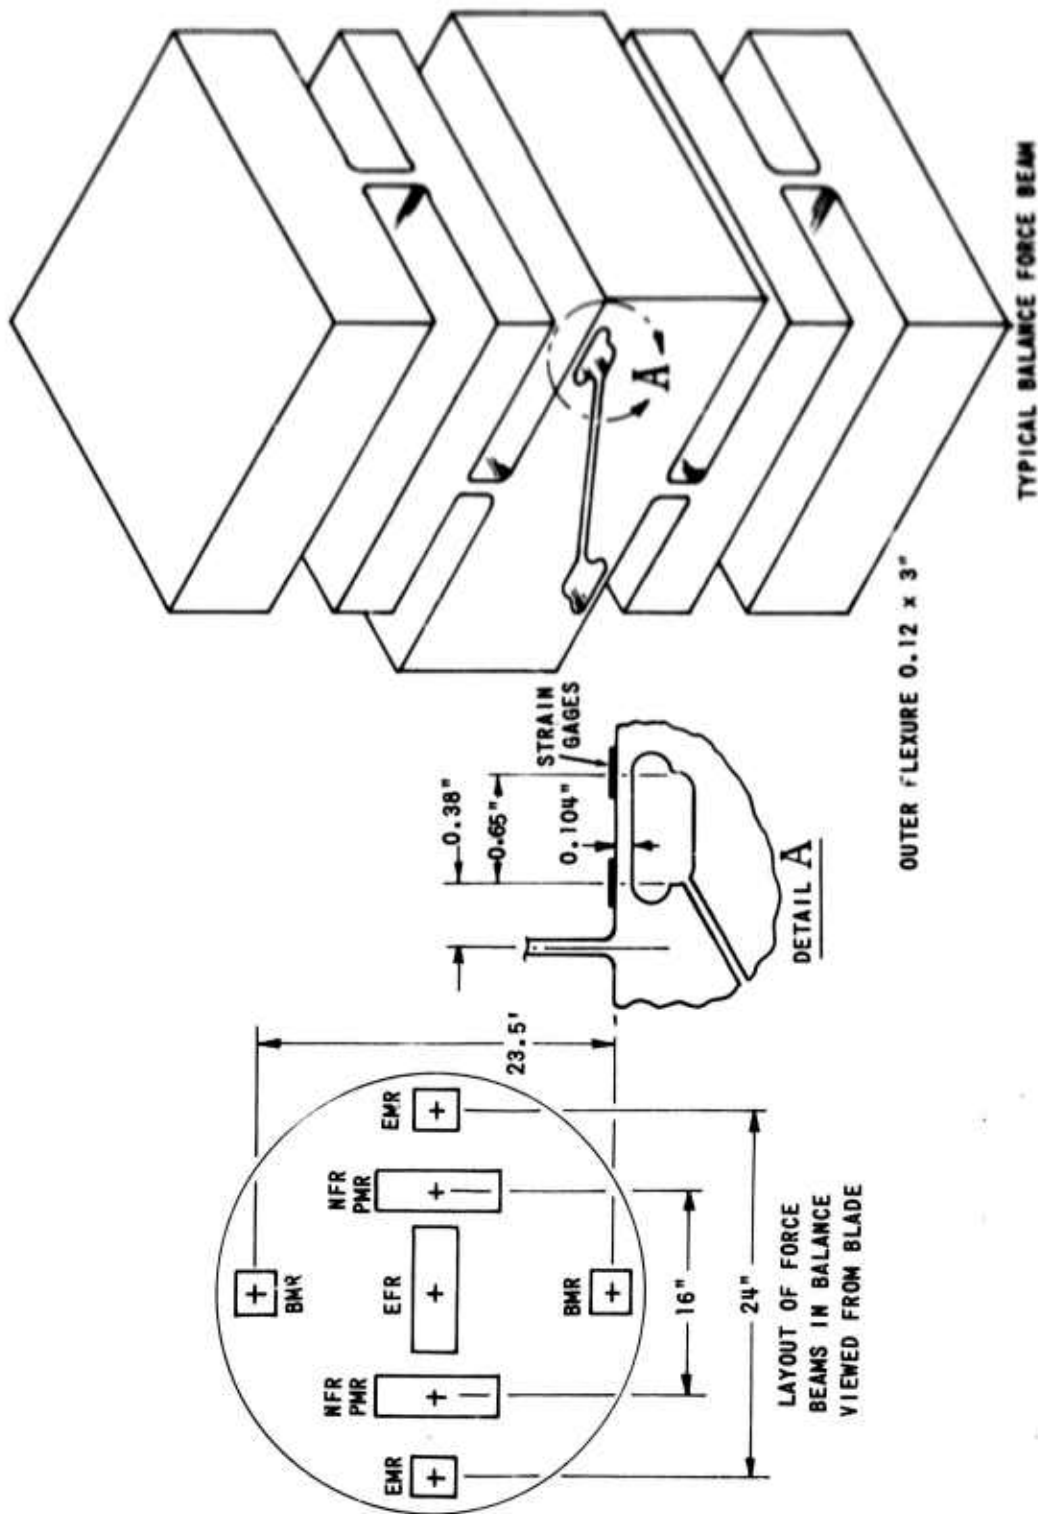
DIMENSIONAL DRAWING OF FORCE BALANCE SYSTEM
